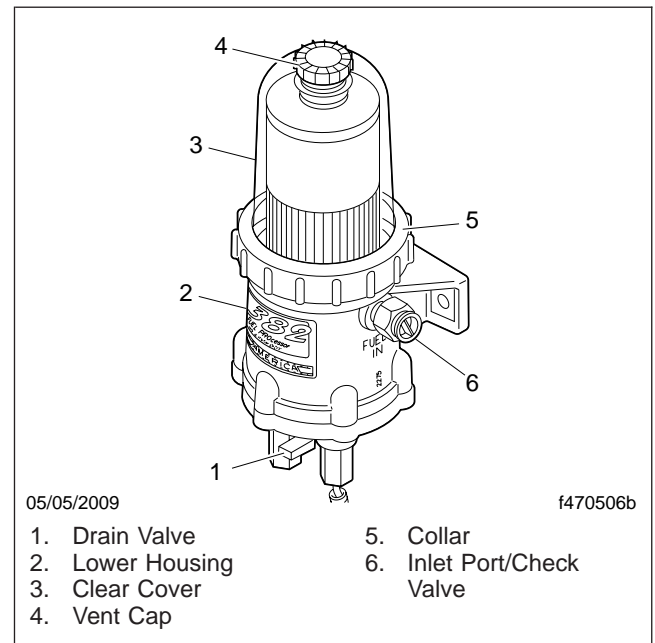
, DAVCO Fuel/Water Separator (Fuel Pro 382 Shown)
